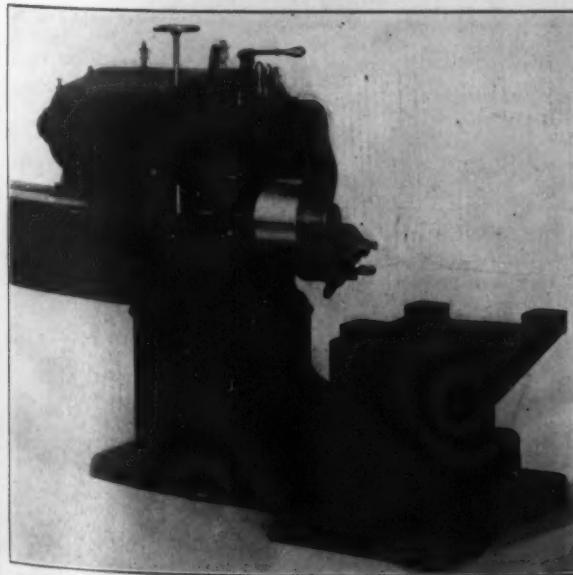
Fully Inclosed Gears of 20-in. Headstock.
